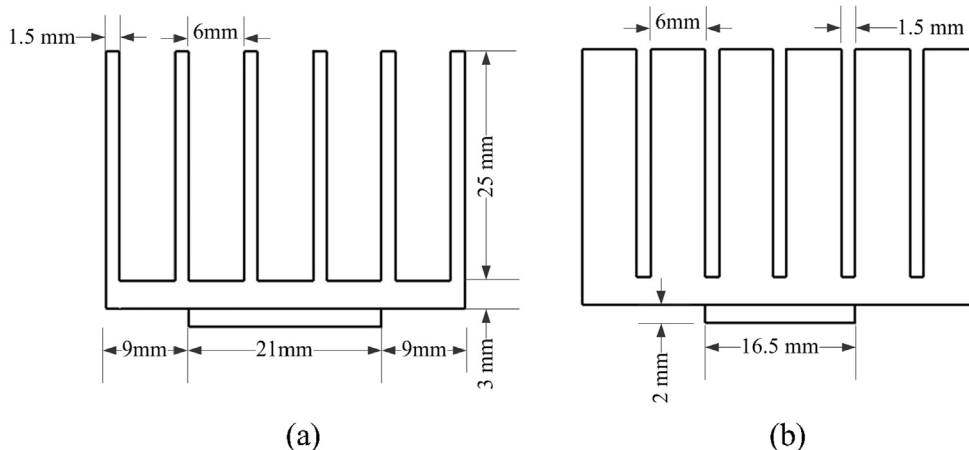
Geometrical dimensions of the heat radiator: (a) front view; (b) left view.
